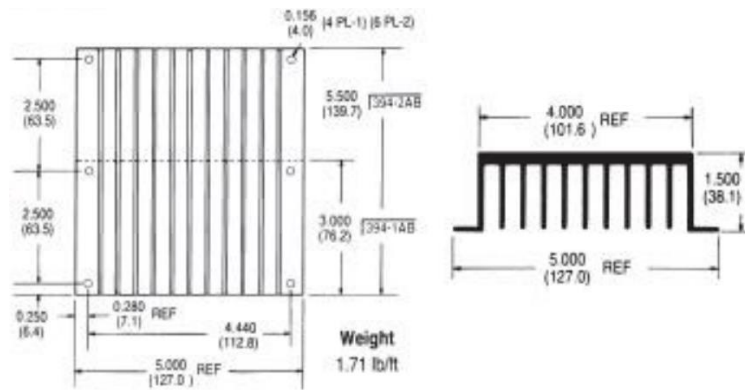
Mechanical Dimensions of HeatSink 394-2AB
